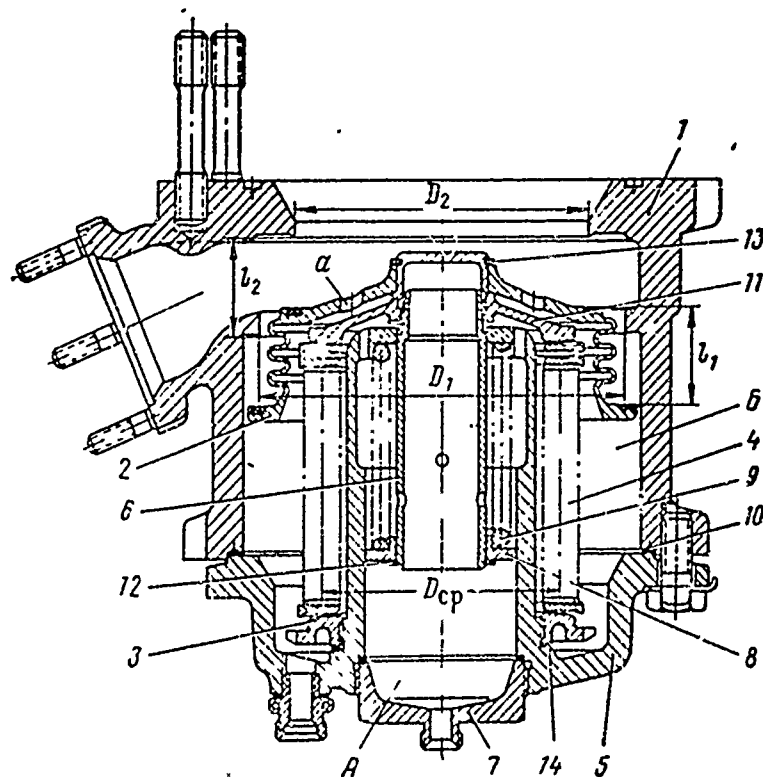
A normally open propellant valve: A - controlling cavity; 5 - liquid cavity; 1 - housing; 2 - dual-disk valve; 3 - nut; 4 - bellows; 5 - covers; 6 - bushing; 7 - connection tube; 8 - thrust collar; 9 - spring; 10, 14 - gaskets; 11 - bellows base; 12, 13 - spring rings; a - opening. (Only one exhaust pipe is shown).
